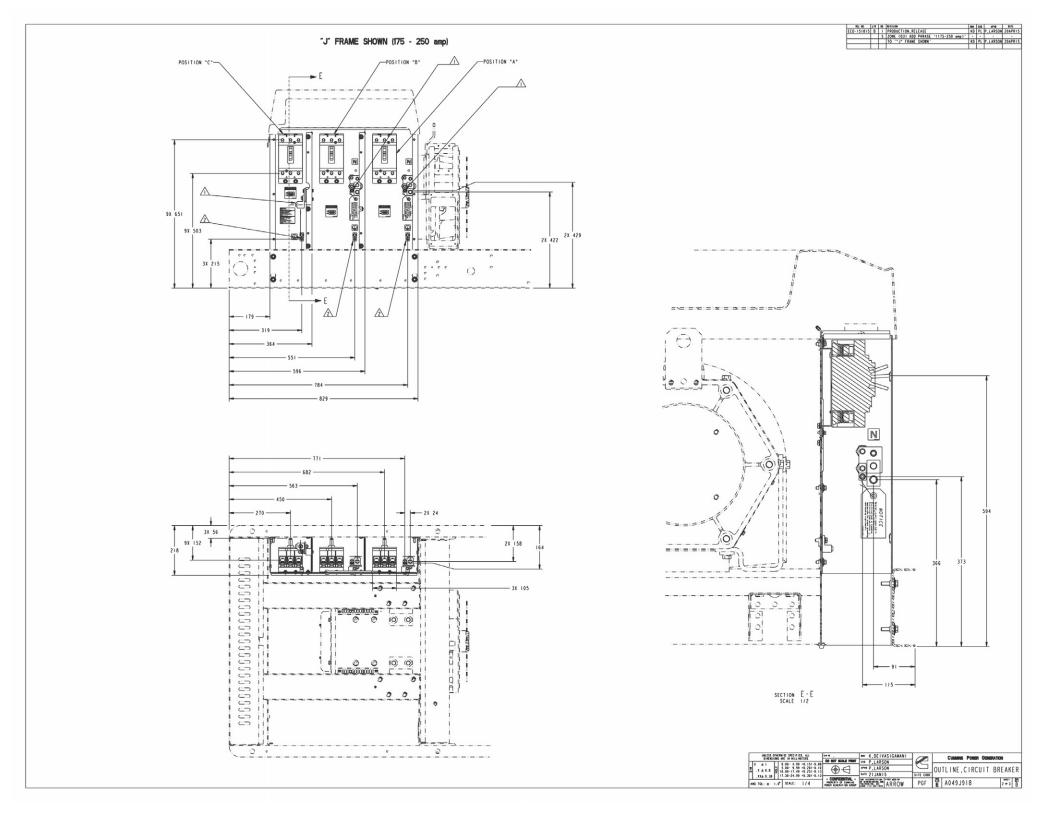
CIRCUIT BREAKER OUTLINE (SHEET 2 OF 3)
